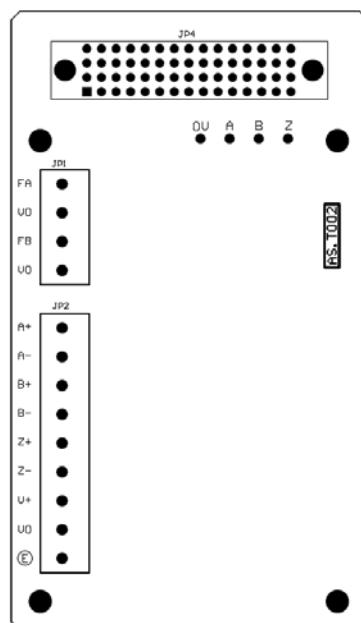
Layout of Asynchronous Motor PG Card Terminals
